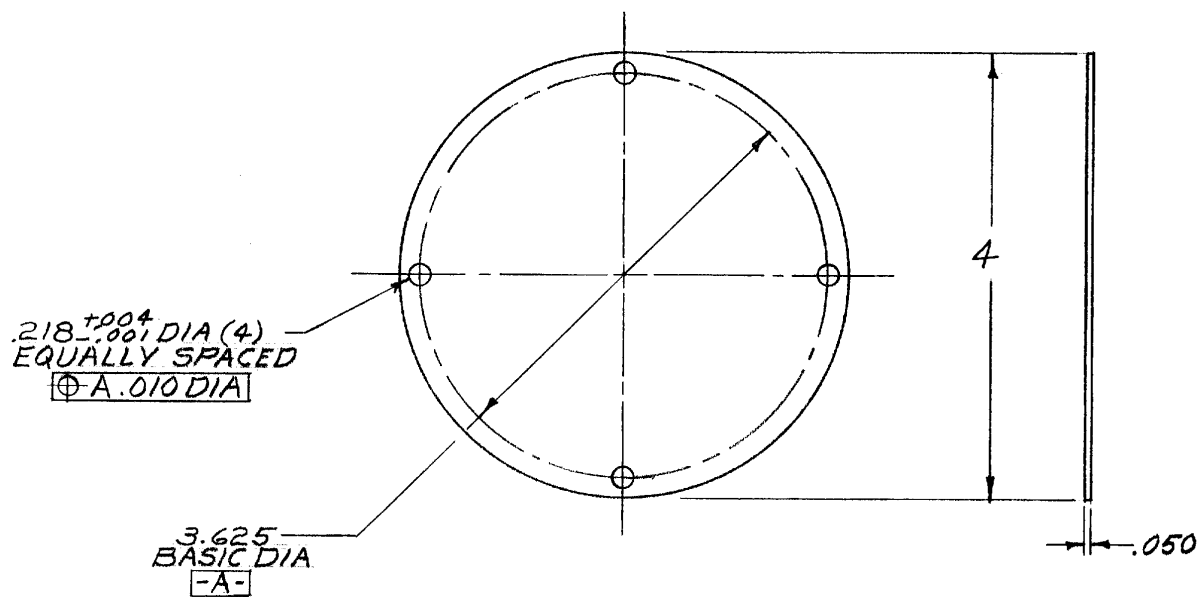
Disk Cover for Opening in the Wind-Up End of Processor
